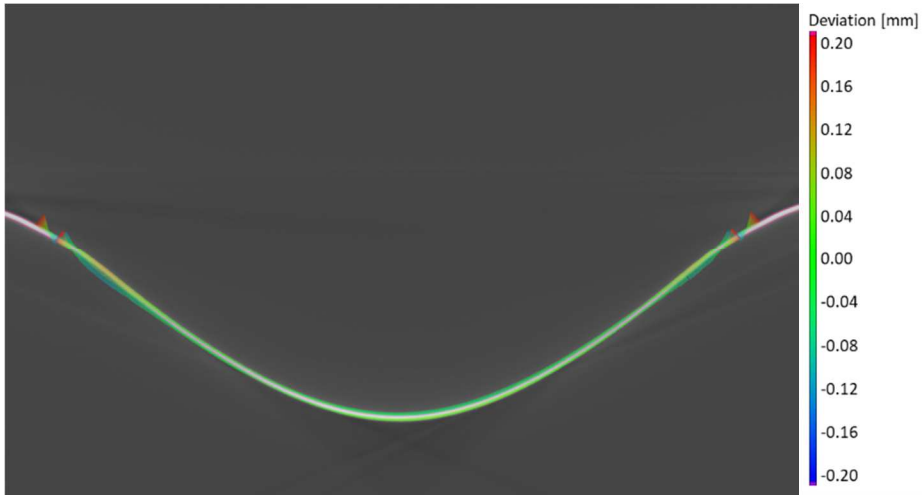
One of the drawpiece sections with marked deviations captured using X-ray tomography
